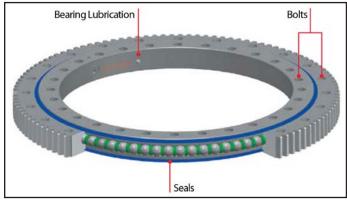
Holes or fittings in the bearing races facilitate lubrication when the bearings have integral seals — a possibility even in largediameter bearings (e.g., 100").
